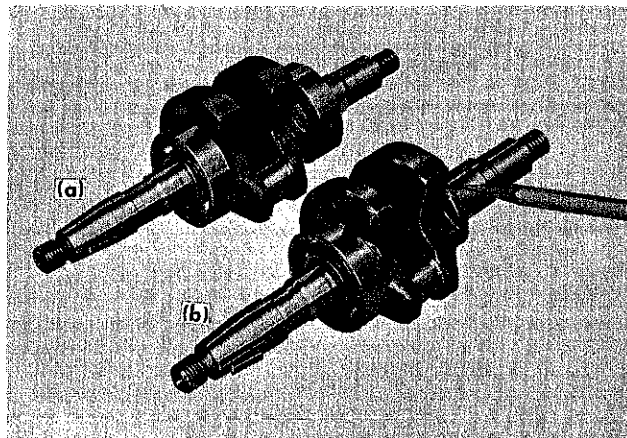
Crankshaft (a) with two ball bearings, is used with Model 1-52 and 1-53 engines. Crankshaft (b) is used with other engine models, having one ball bearing and one needle roller bearing. Bearing surfaces should be checked carefully for roughness and uneven wear.
